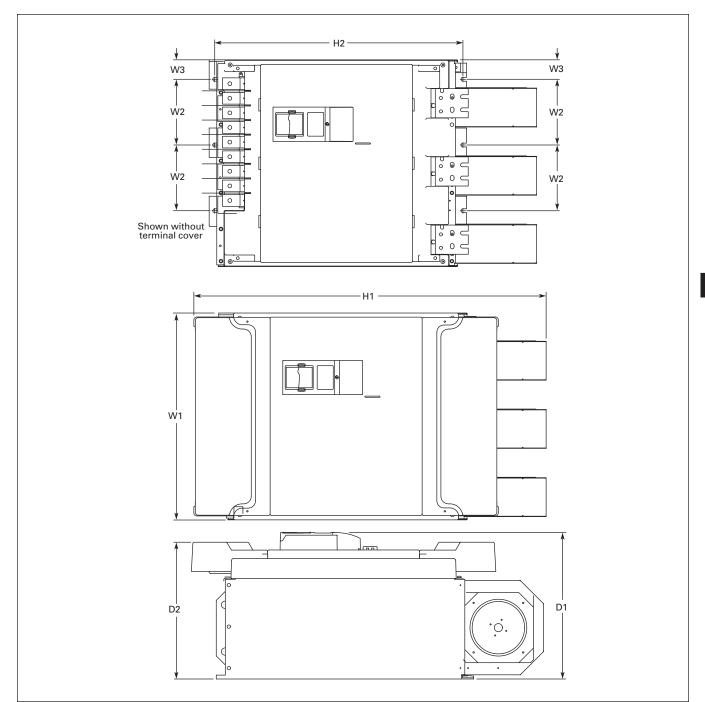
SPX9000 Dimensions, NEMA Type 1 FR11 Freestanding Drive
